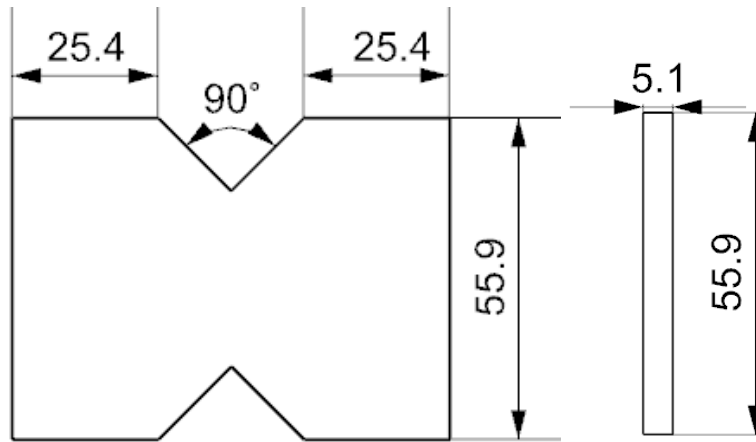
Shear Test Specimen for ASTM D7078[49] shear test.
